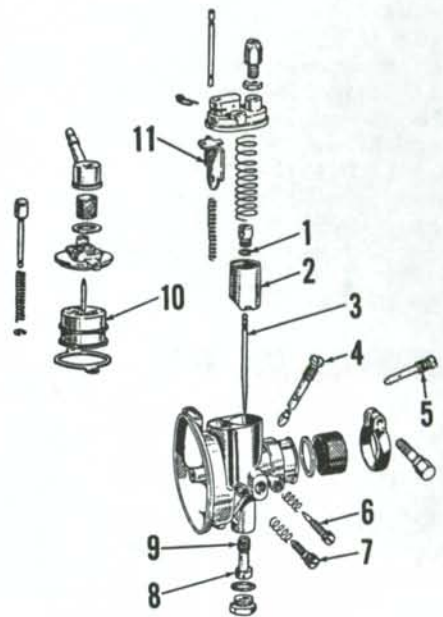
Exploded view of Del'Orto carburetor. Idle mixture is adjusted at needle (6).
